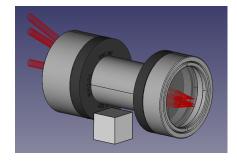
CAD image of the optomechanical setup, with a 10x10x10 mm cube as a size reference.
